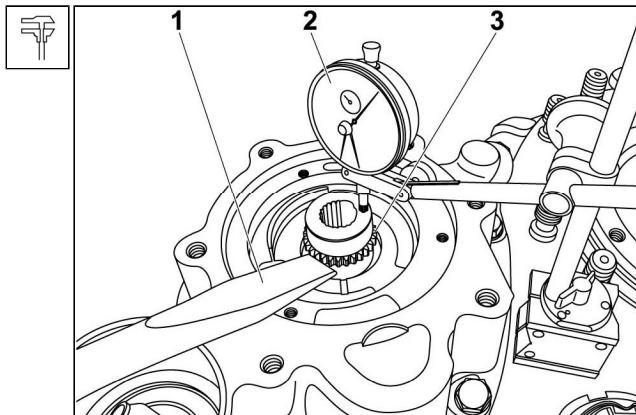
Inspection of the input shaft axial clearance
